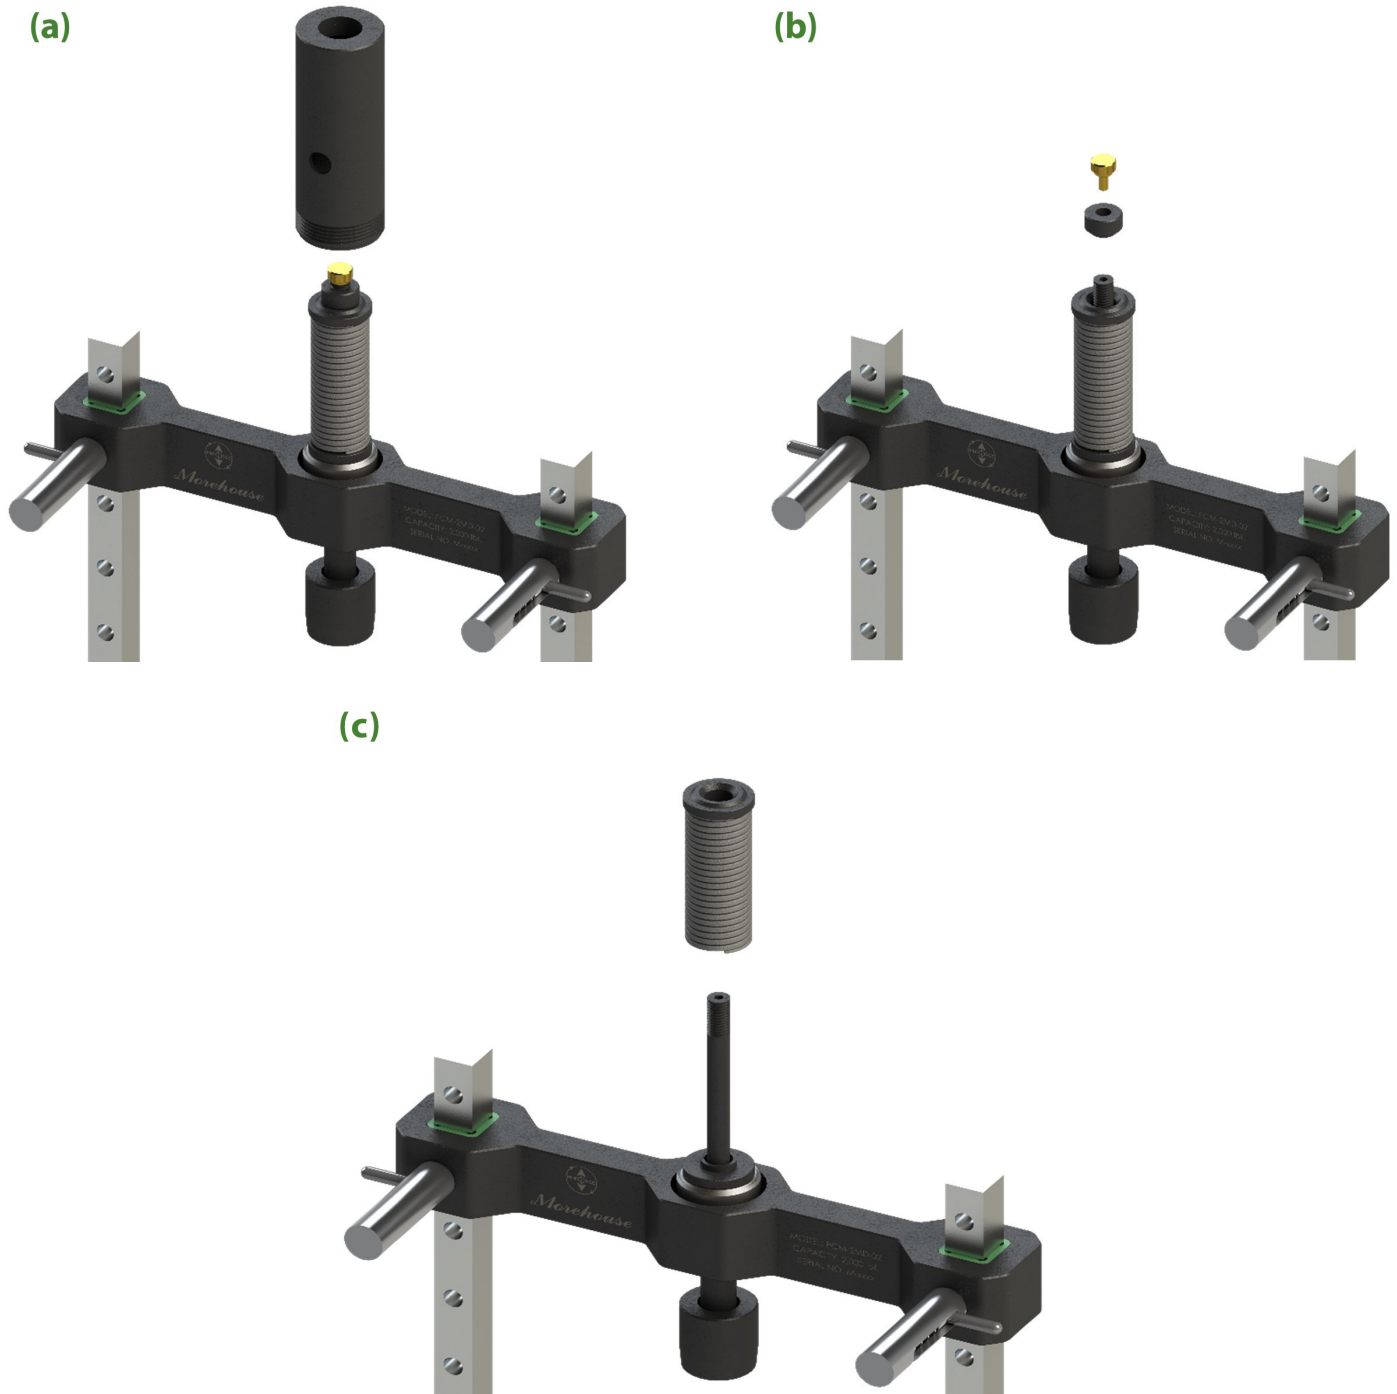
Changing the Control Spring: a) Removing the Housing, b) Removing the Thumb Screw and Spherical Nut; c) Removing the Control Spring
